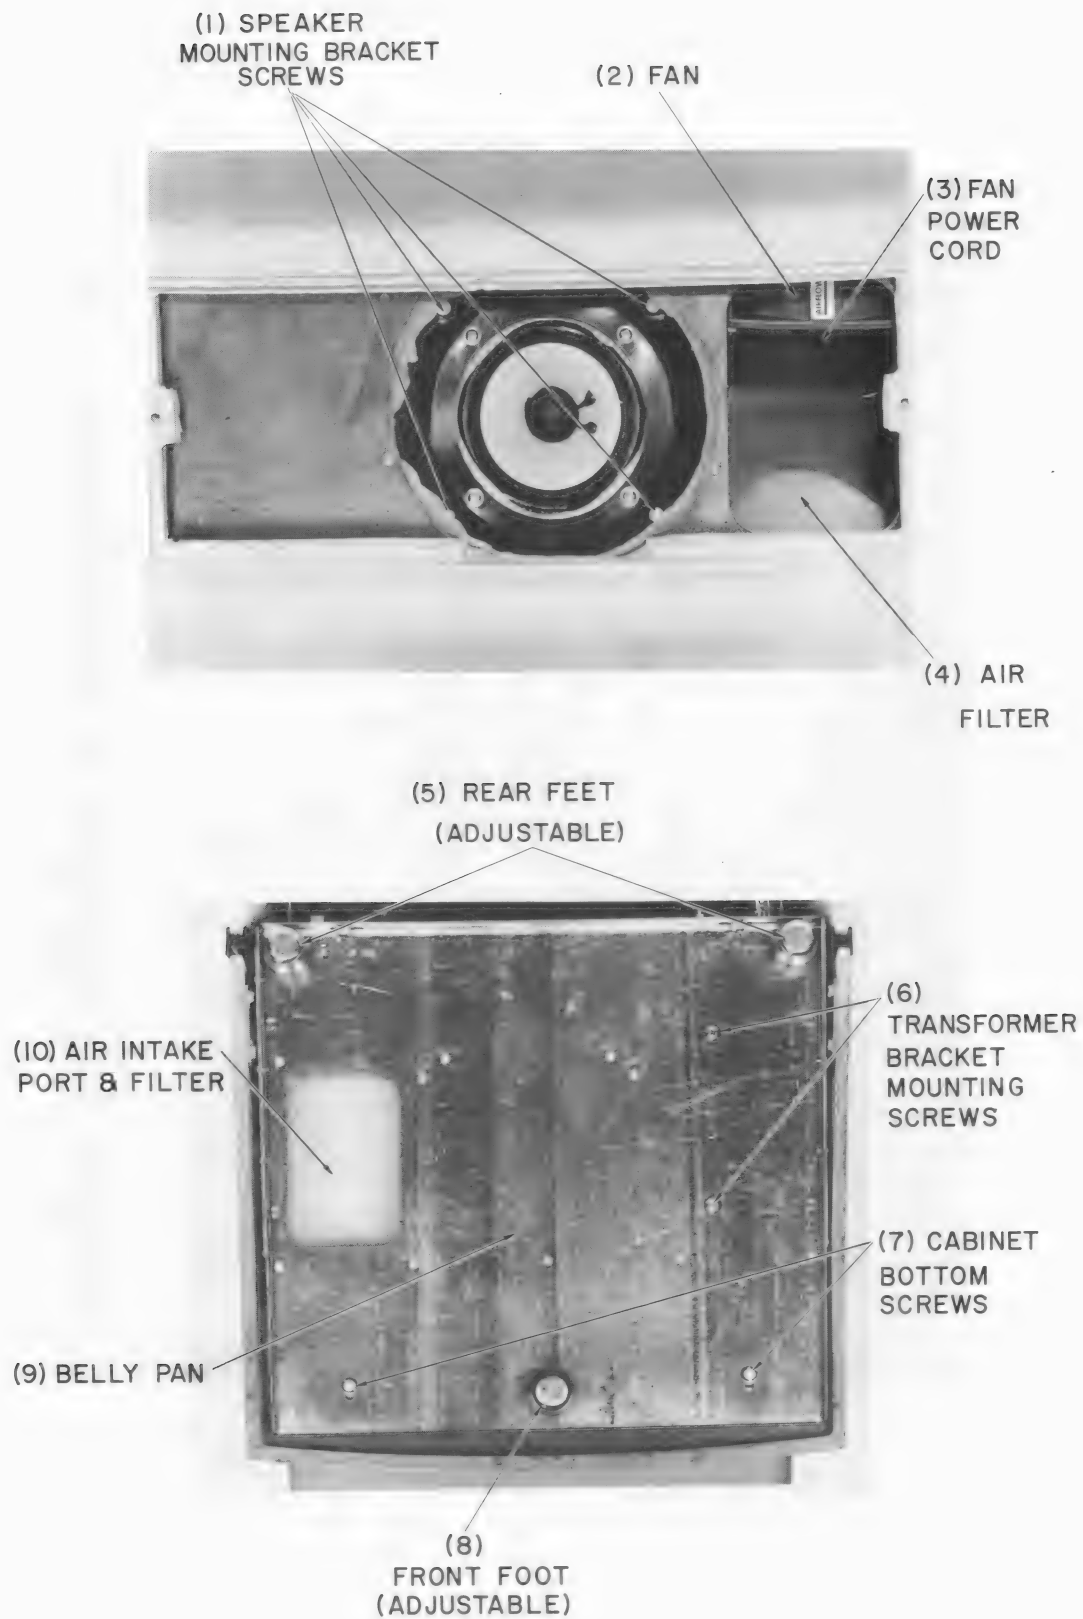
SPEAKER/FAN FRONT VIEW AND MAIN FRAME BOTTOM
